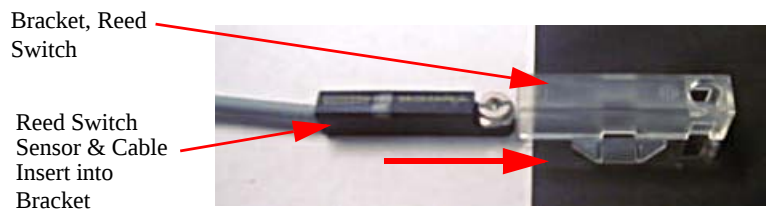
Reed Switch Cable Assembly inserts into Bracket
